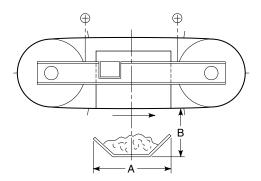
Self-cleaning suspended magnetic separator over conveyor run (cross-belt), where A = conveyor belt width; B = distance to magnetic belt.
